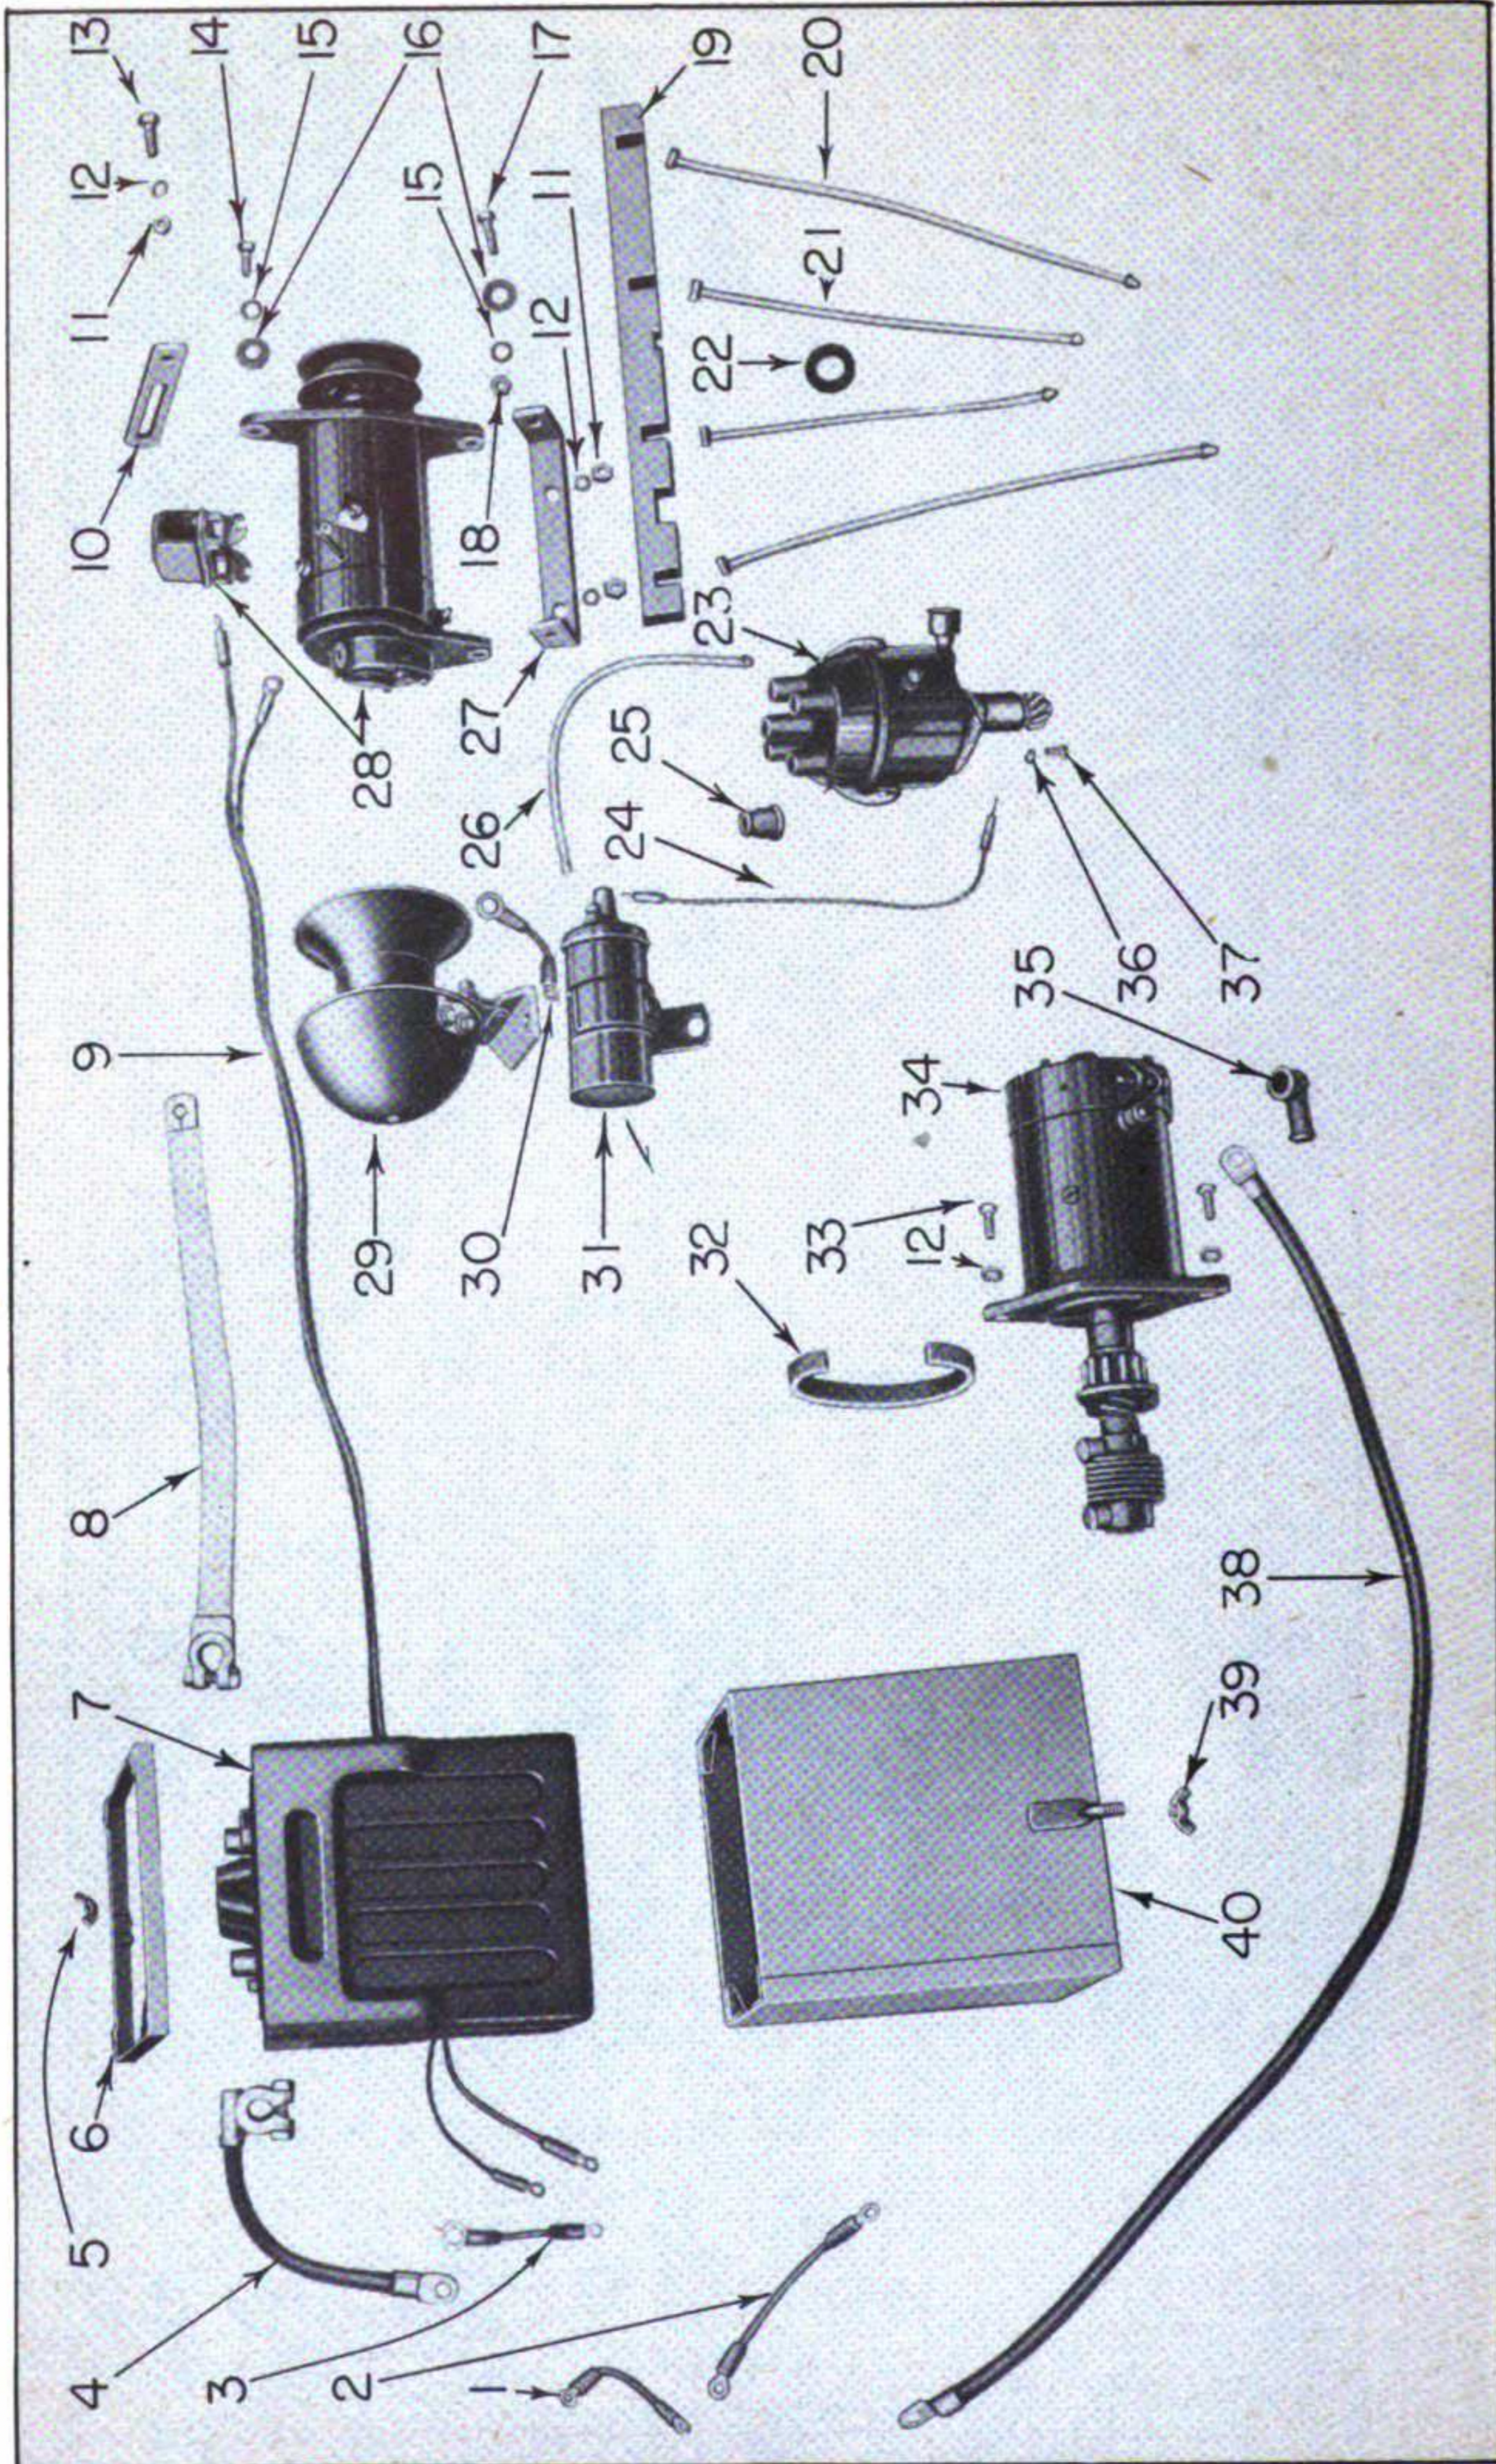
0604 ELECTRICAL EQUIPMENT
